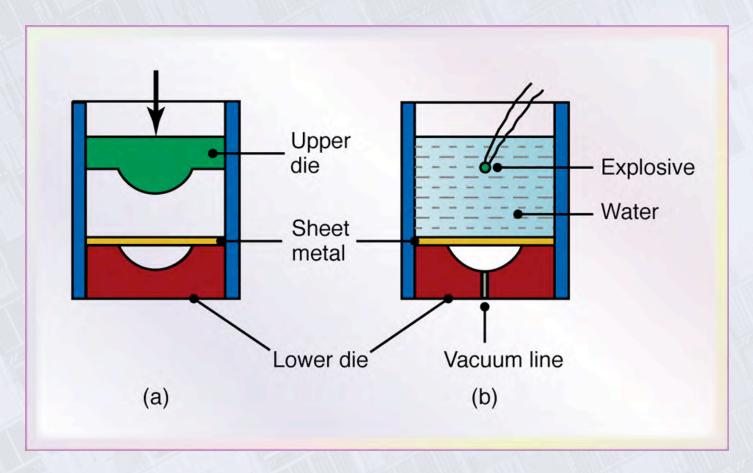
Two methods of making a dish-shaped sheet-metal part: (a) pressworking using a male and female die, (b) explosive forming using one die only.
